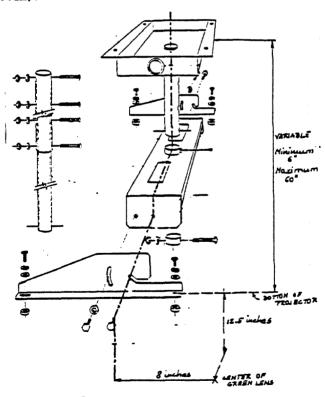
PROJECTOR MOUNT LOCATION
